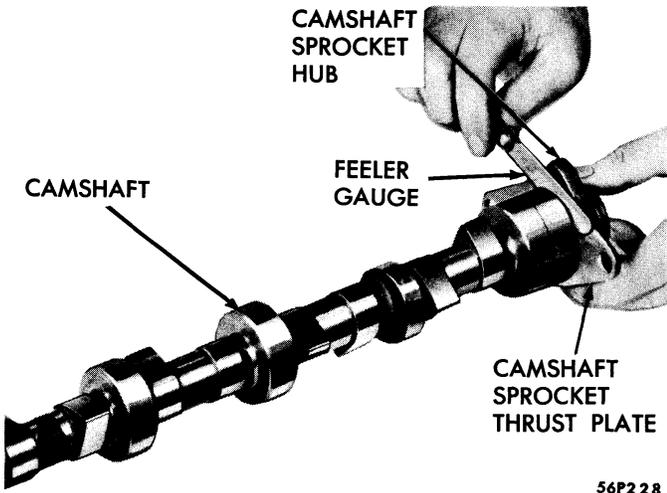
Measuring Camshaft End Play—6 Cylinder Engine
